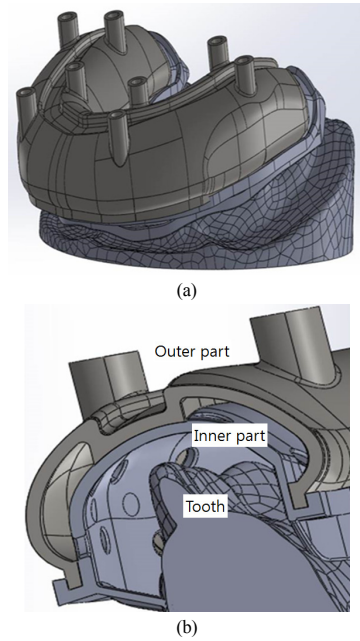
Assemble model of vacuum oral cleaner and teeth: (a) assemble model; (b) sectional view
